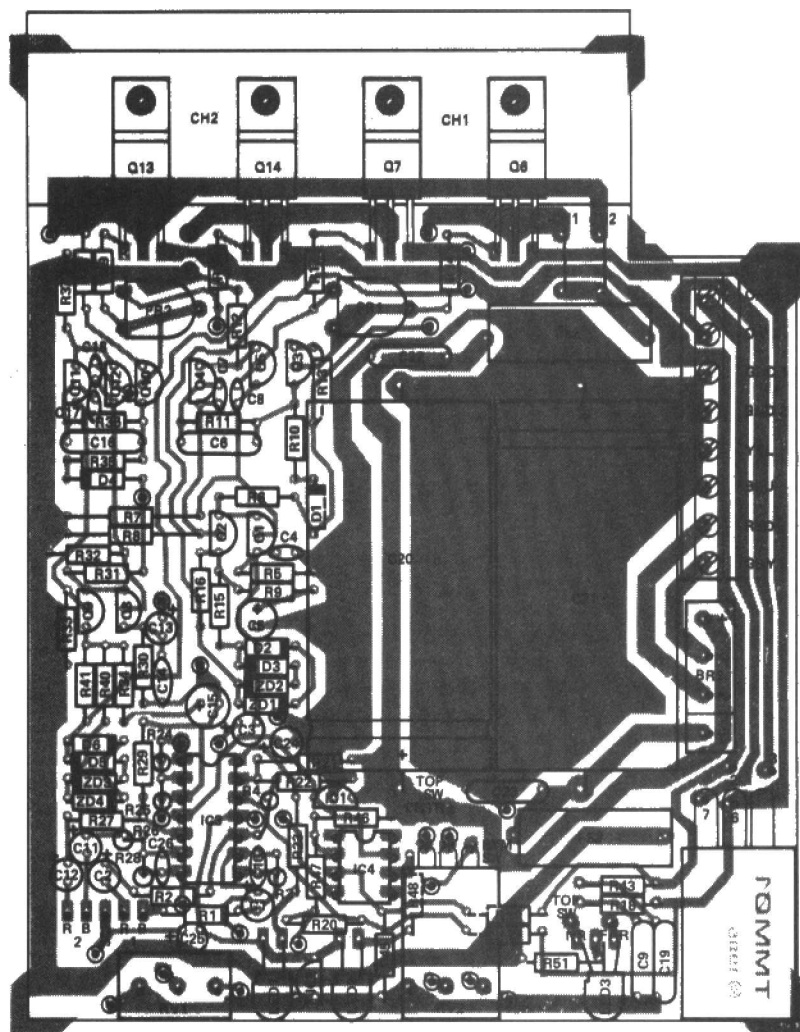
The assembly of MOSFET, PCB, bracket and heatsink.
